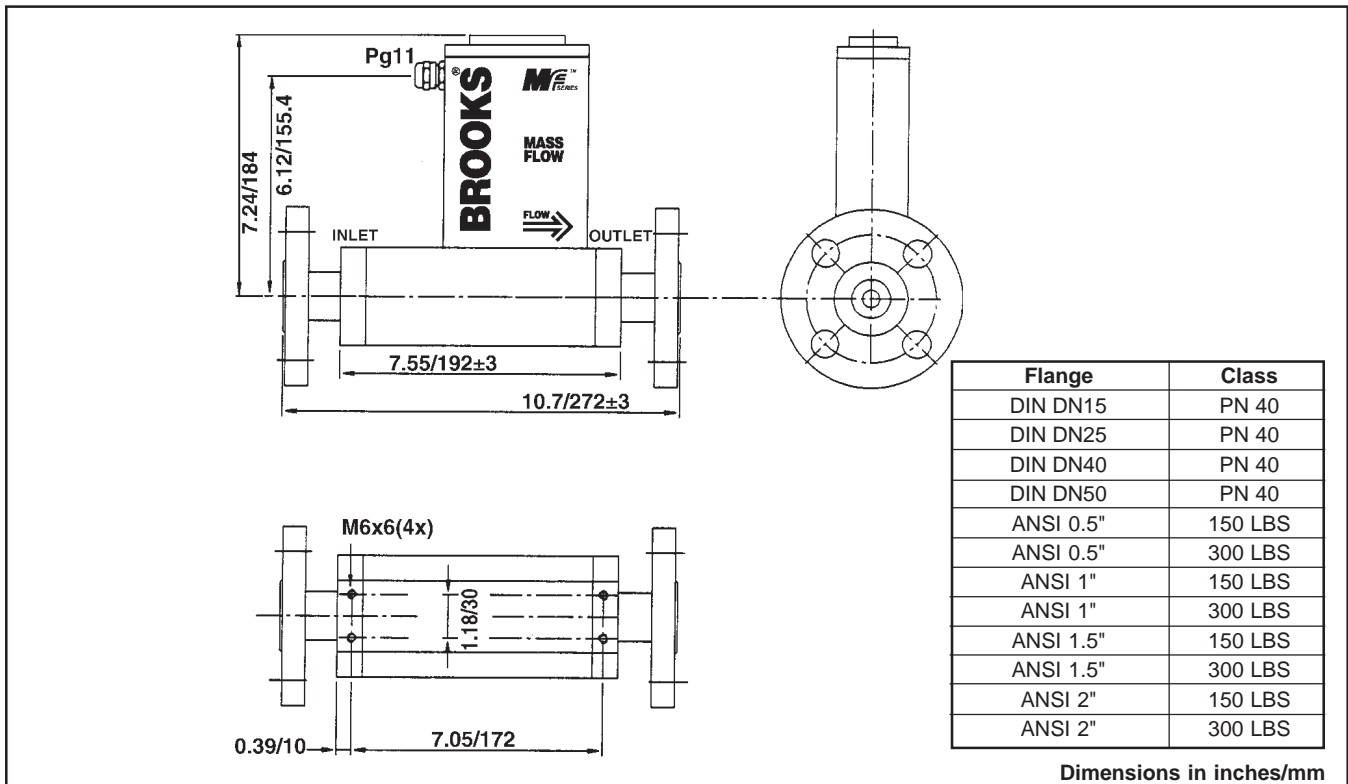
Model Mf63 Meter with Flange Dimensions
